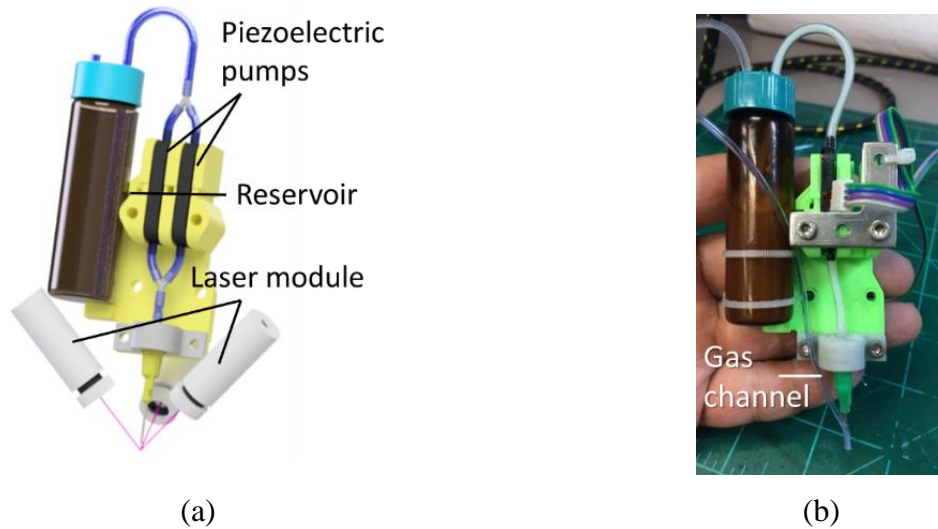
(a): CAD drawing of the initial print head design (b): prototyped apparatus
